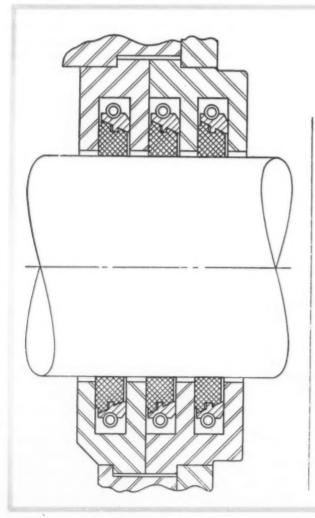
Left — Self-positioning type of segmental carbon-ring seal. Used extensively in steam turbines, the design provides tight sealing, conservation of space, and reduction of shaft length
